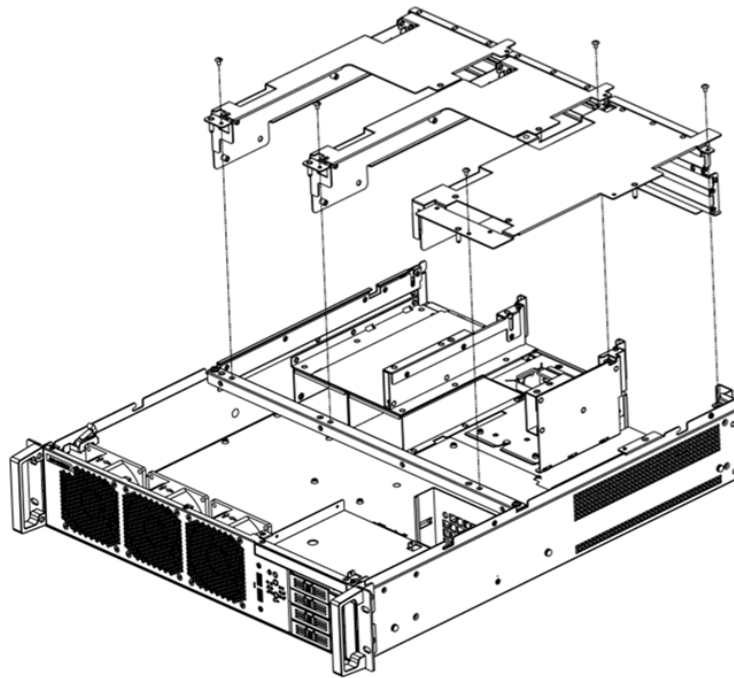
Removing Riser Cage brackets/ 移除RISER CAGE铁件/ 移除RISER CAGE 鐵件
